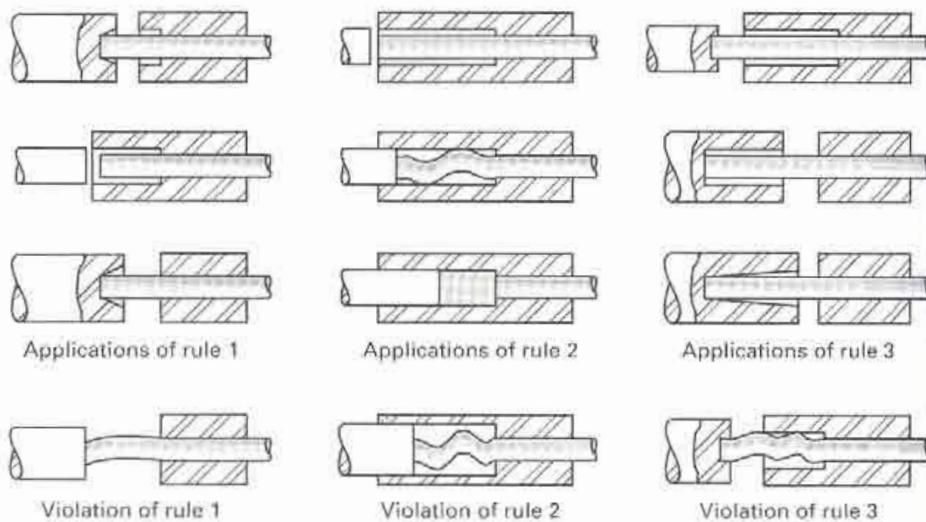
Schematics illustrating the rules governing upset forging. (Courtesy of National Machinery Company, Tiffin, OH.)
